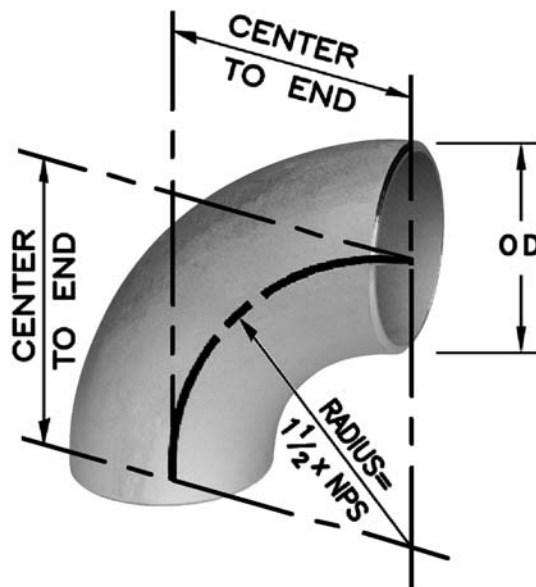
Center-to-end dimension of a 90° long-radius elbow.
